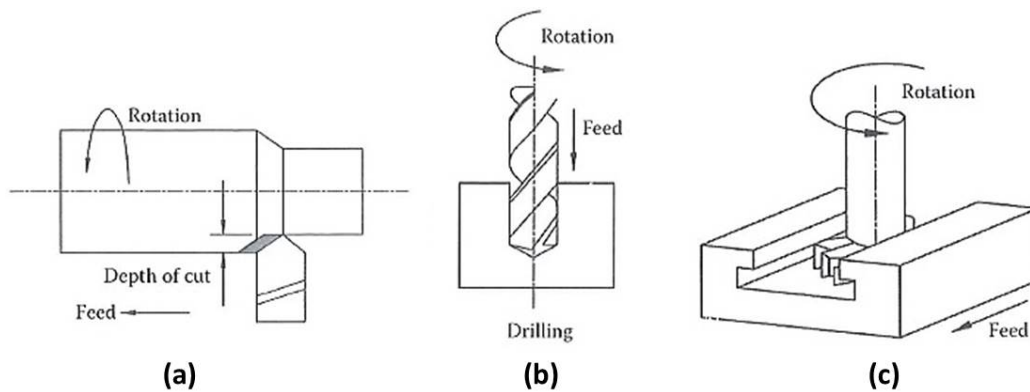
20 Sketches of three types of machining processes: (a) turning, (b) drilling and (c) milling [48].
